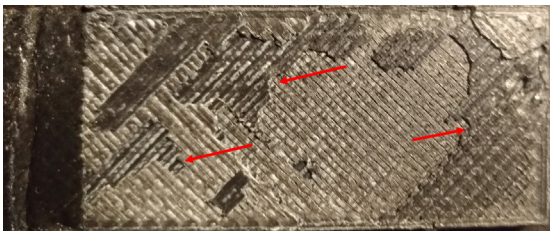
Fractured surfaces after the DCB test for a PA12 + sCF specimen.
